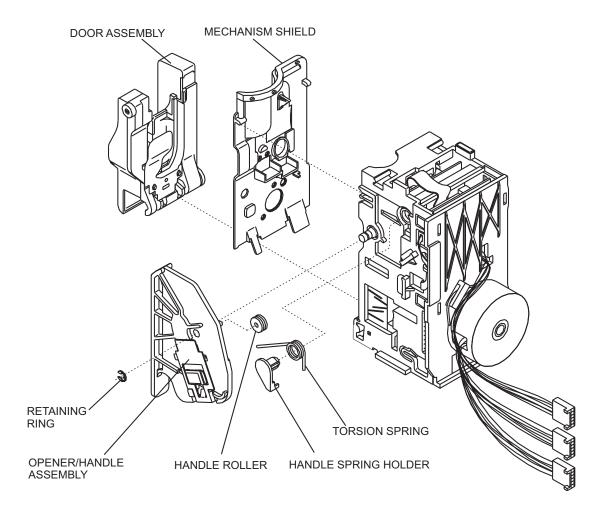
Door Assembly, Opener/Handle, and Mechanism Shield
